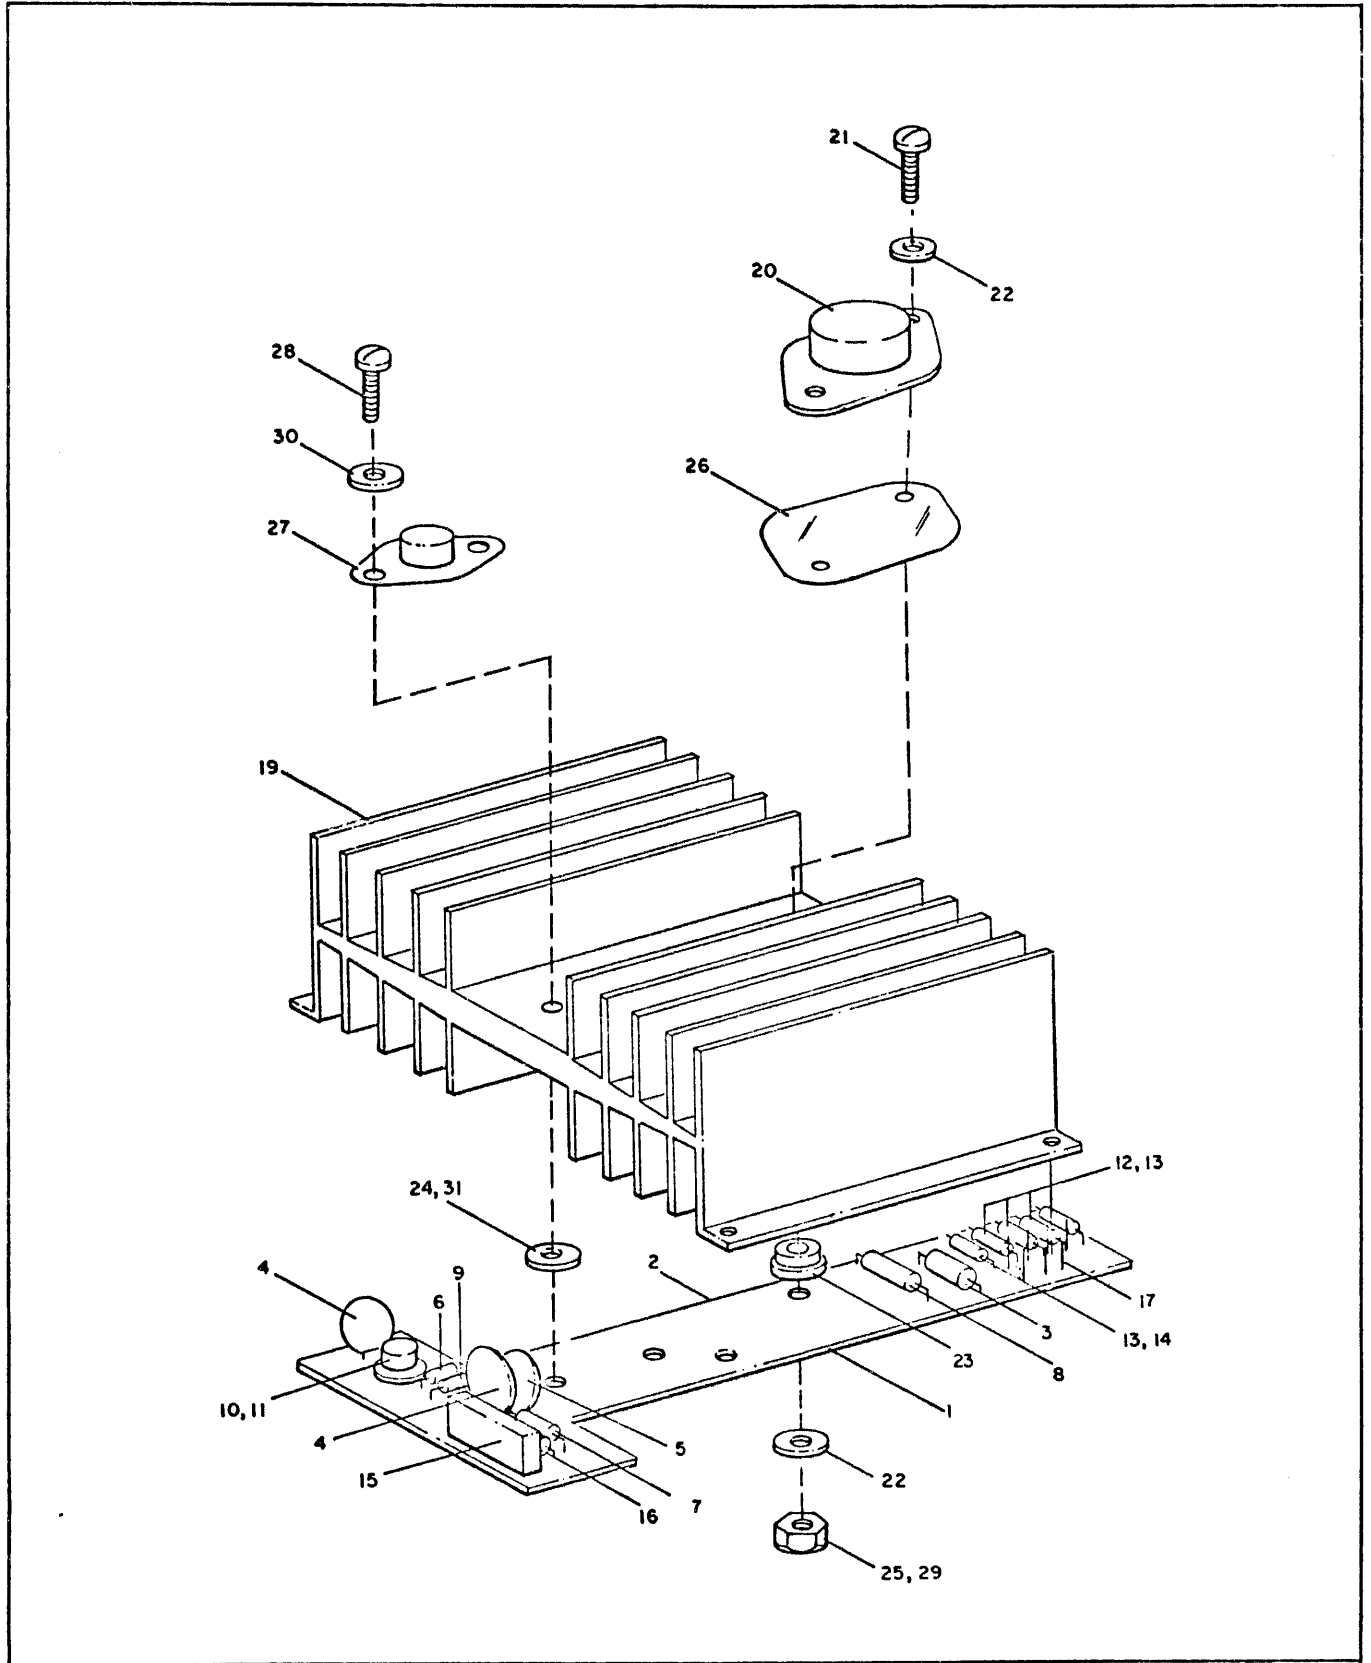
POWER SUPPLY ASSEMBLY
